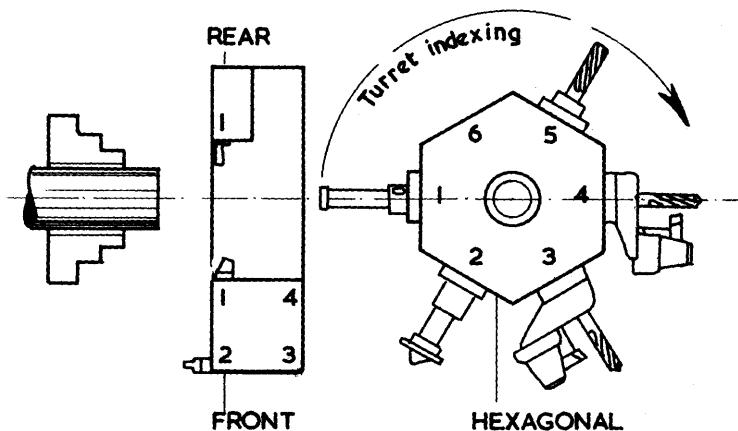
Set-up for Machining Bush on a Capstan Lathe.
